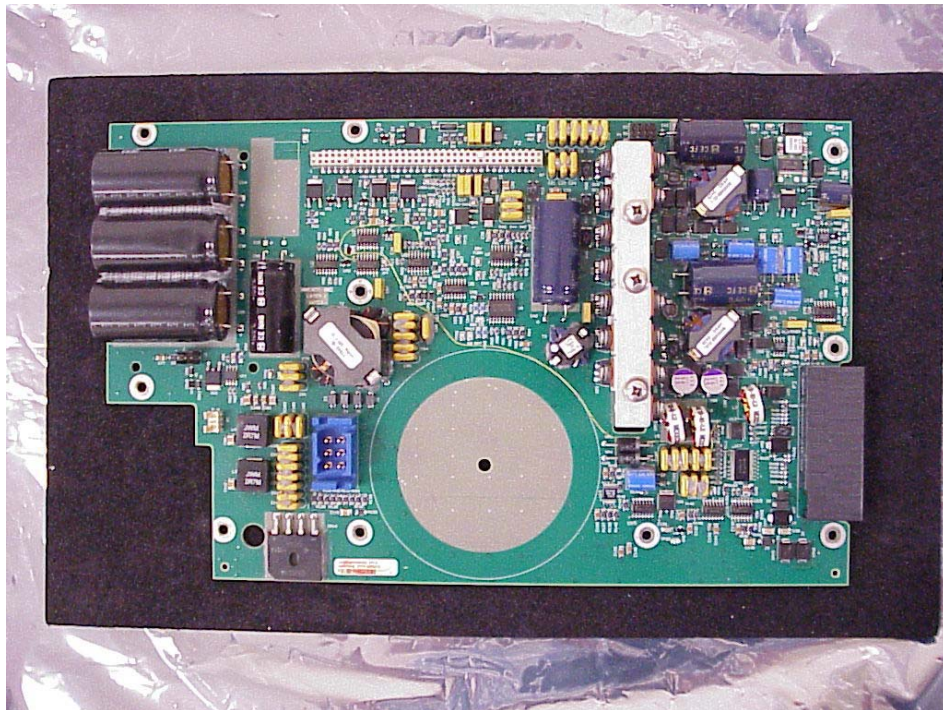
View of 6 MCU Unit, Showing A1 Interconnect Assembly
